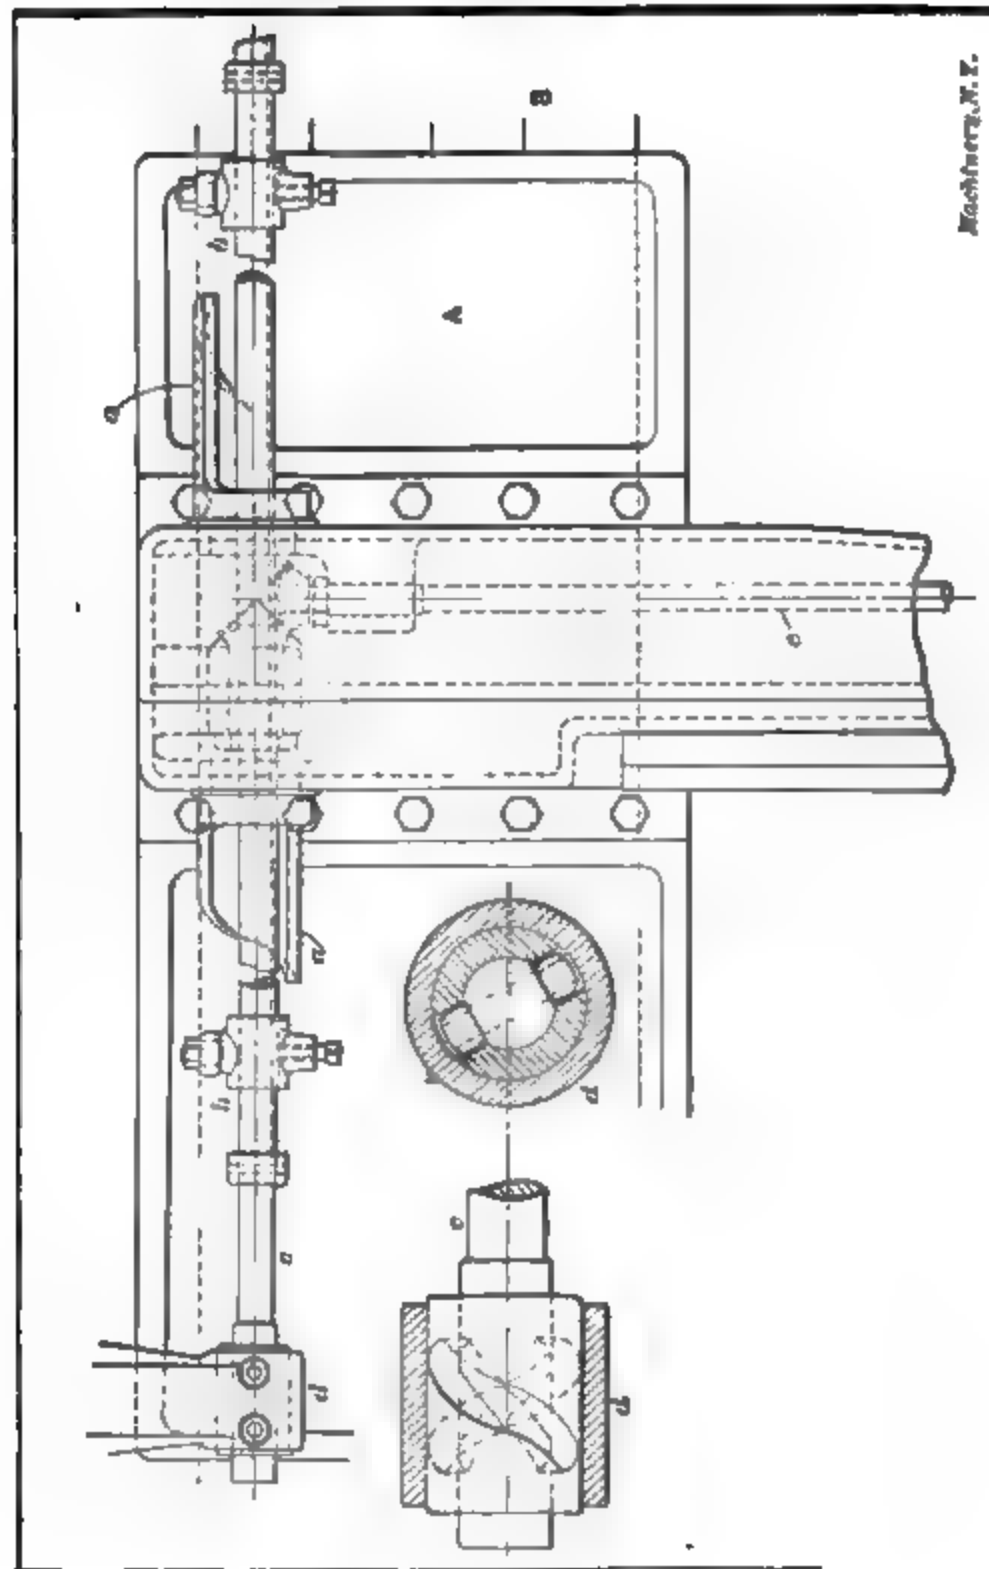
Combined Reversing and Feeding Mechanism for Side Planer
